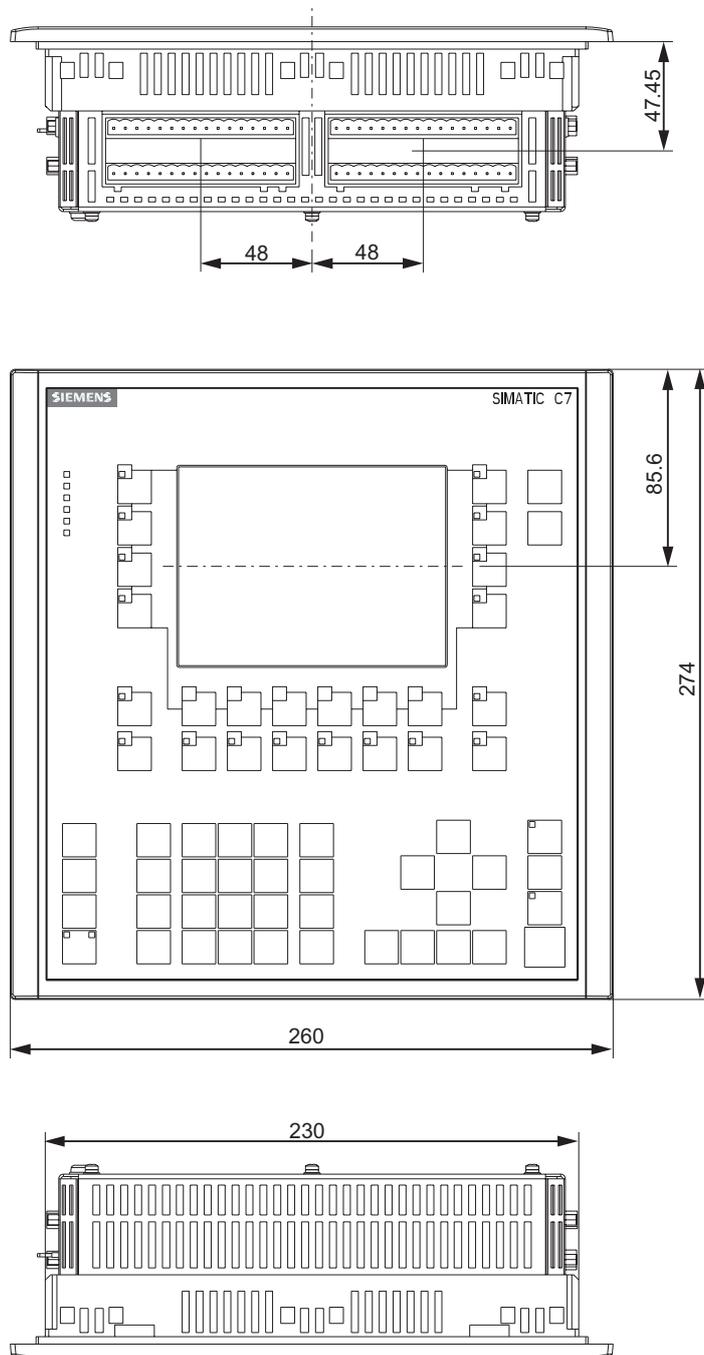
Dimension drawings for the C7-636 Key (dimensions in mm)
